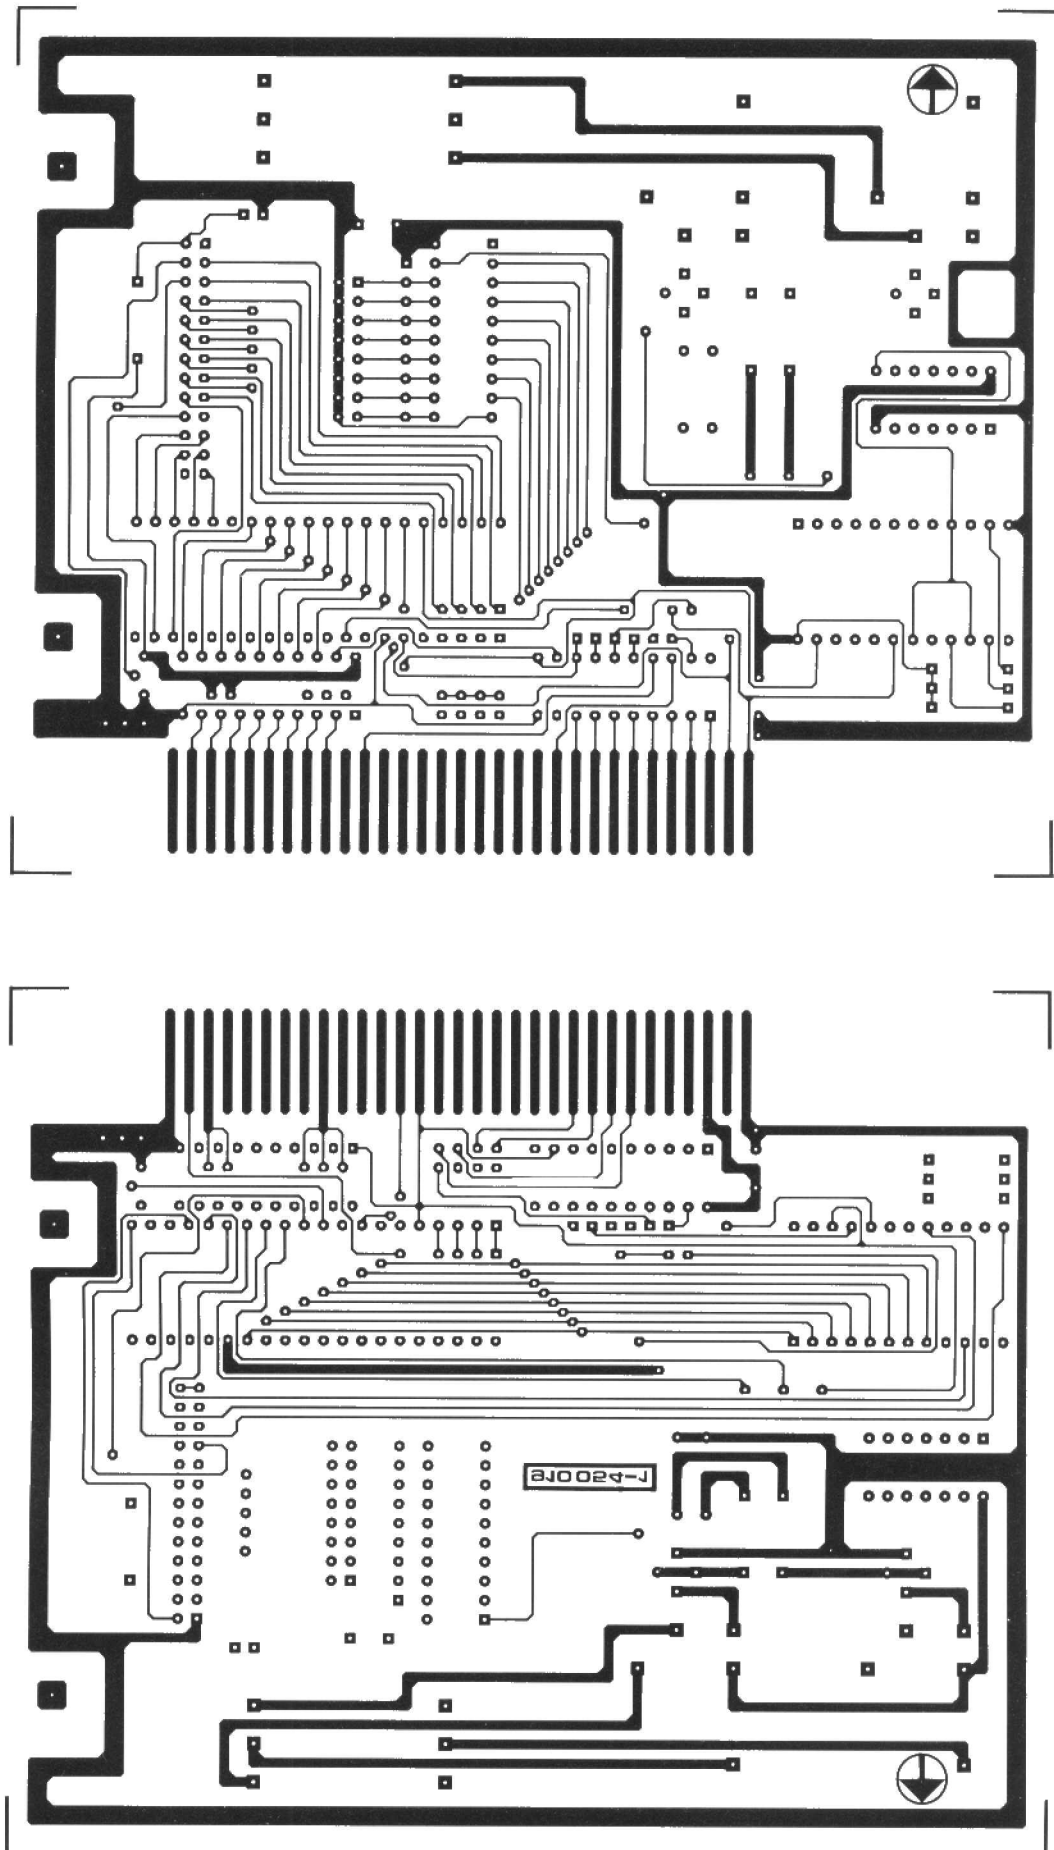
Track layouts of the component side and the solder side of the PC insertion card.
